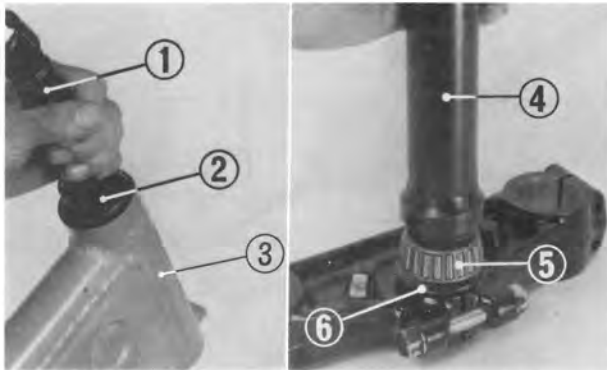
(1) Driver handle (2) Bearing driver attachment (3) Steering stem head (4) Bearing driver (5) Bearing (6) Dust seal
